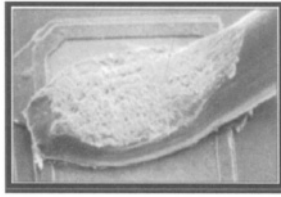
(b) Wedge bond made with chamfer back radius tool [Courtesy: Gaiser Tool]
